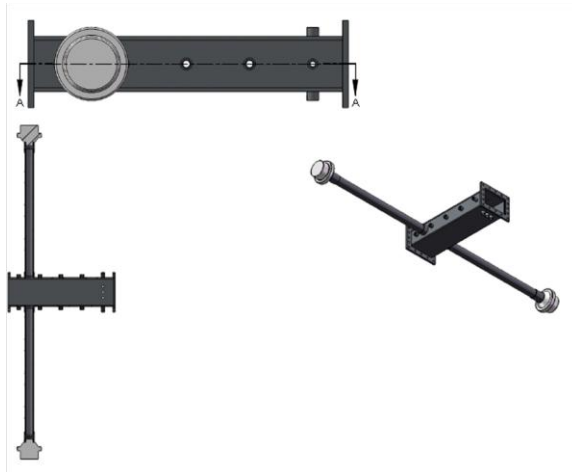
Drawing of the fuel mixing and acoustic forcing section
